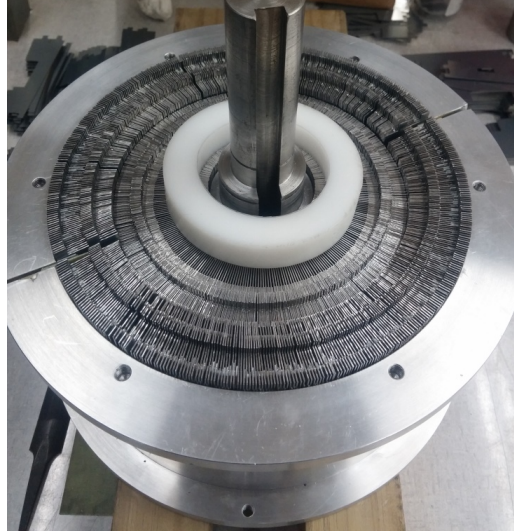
Secondary, rotating side, of RT placed inside the primary, stationary side, before the end plate is fitted.
